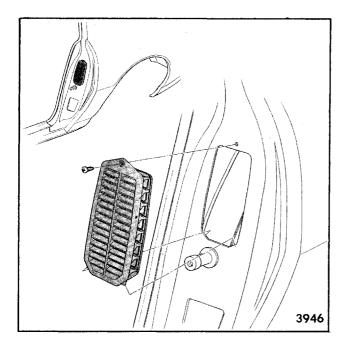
Pressure Relief Valve - F Styles (H-27, 77 Styles Similar)
